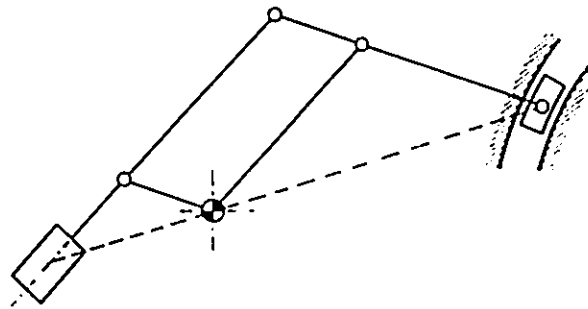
Balancing of a part guided through a curvilinear path using counterweights
